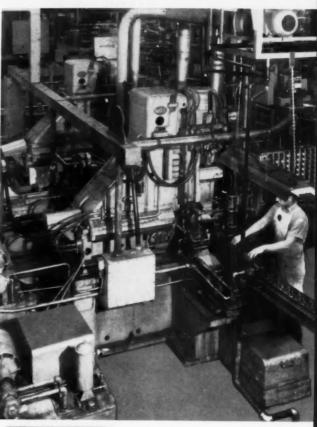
Motch & Merryweather duplex milling machine handles the straddle-milling of four-jet throttle bodies ahead of the inline transfer machine. It is equipped with a four-station indexing table, permitting the operator to load parts while the milling head on the opposite side is in action. Parts are unloaded automatically.
